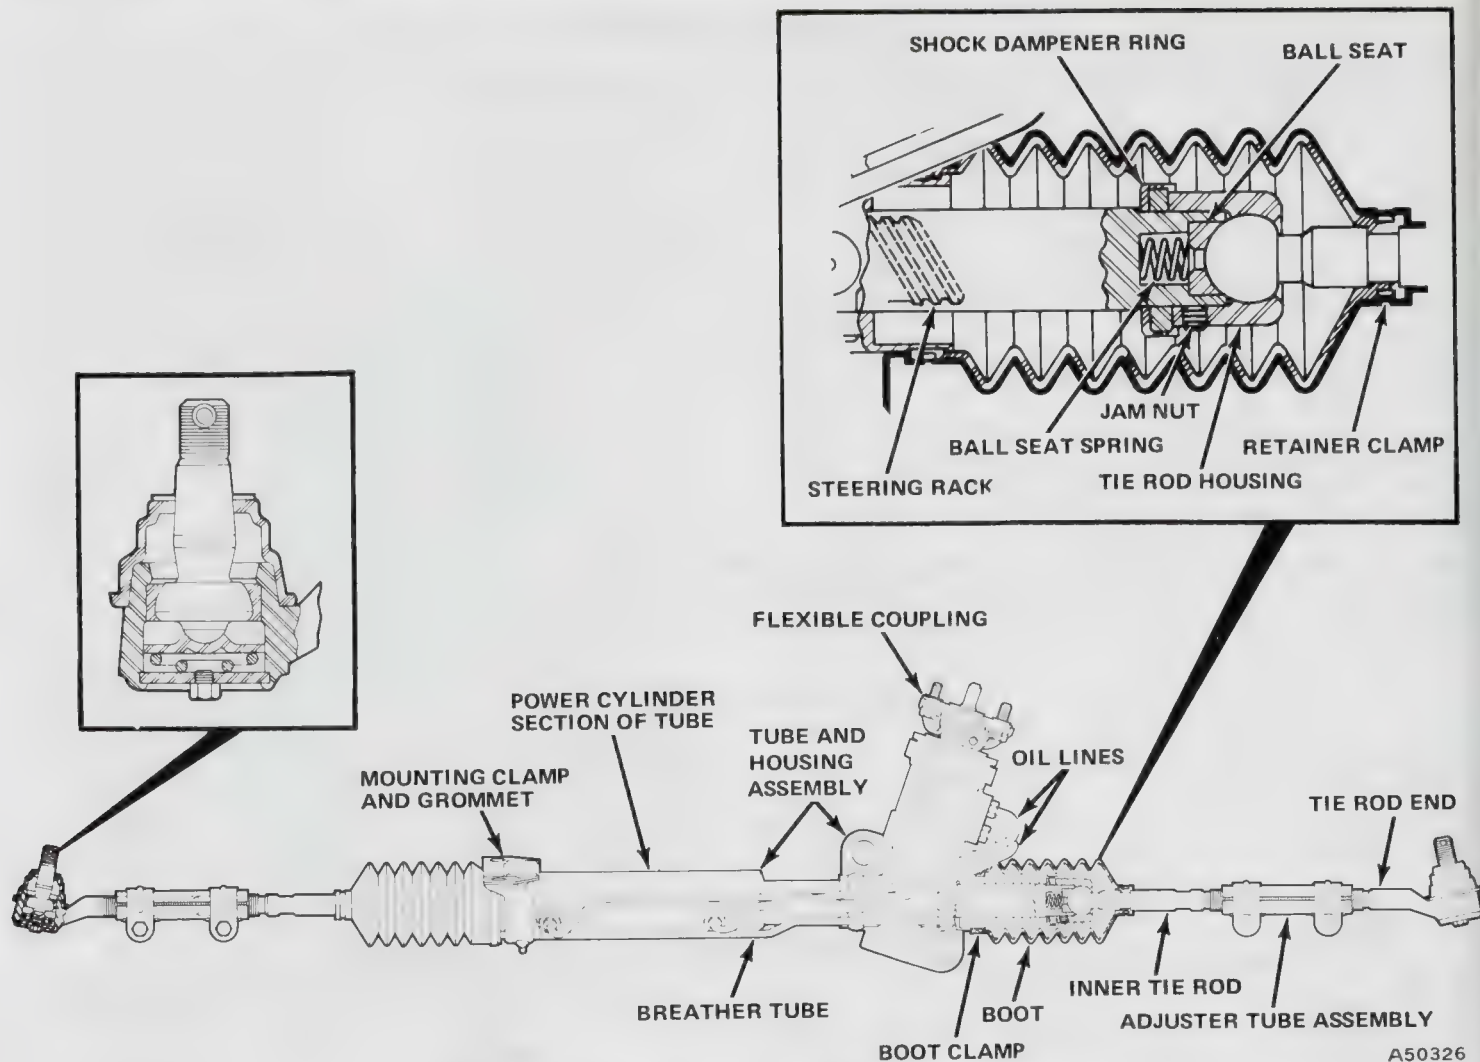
K-46 Power Rack and Pinion Steering Gear—Pacer
